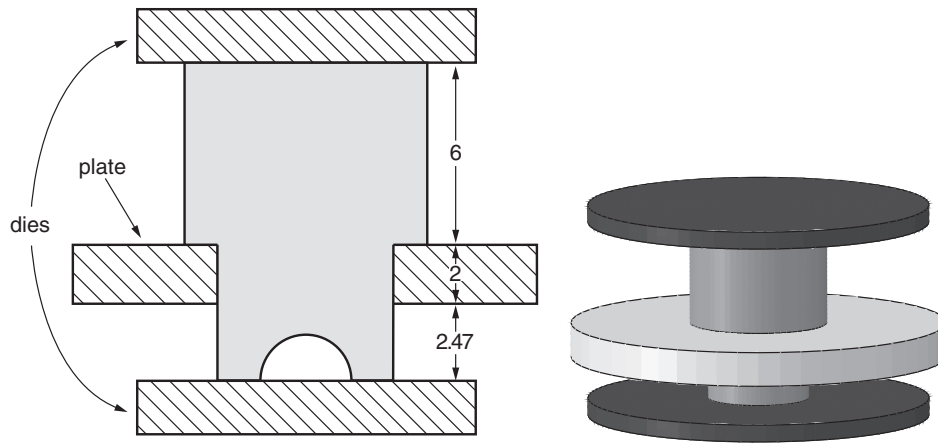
Rivet assembled with the forming tools. All dimensions are in millimeters.
